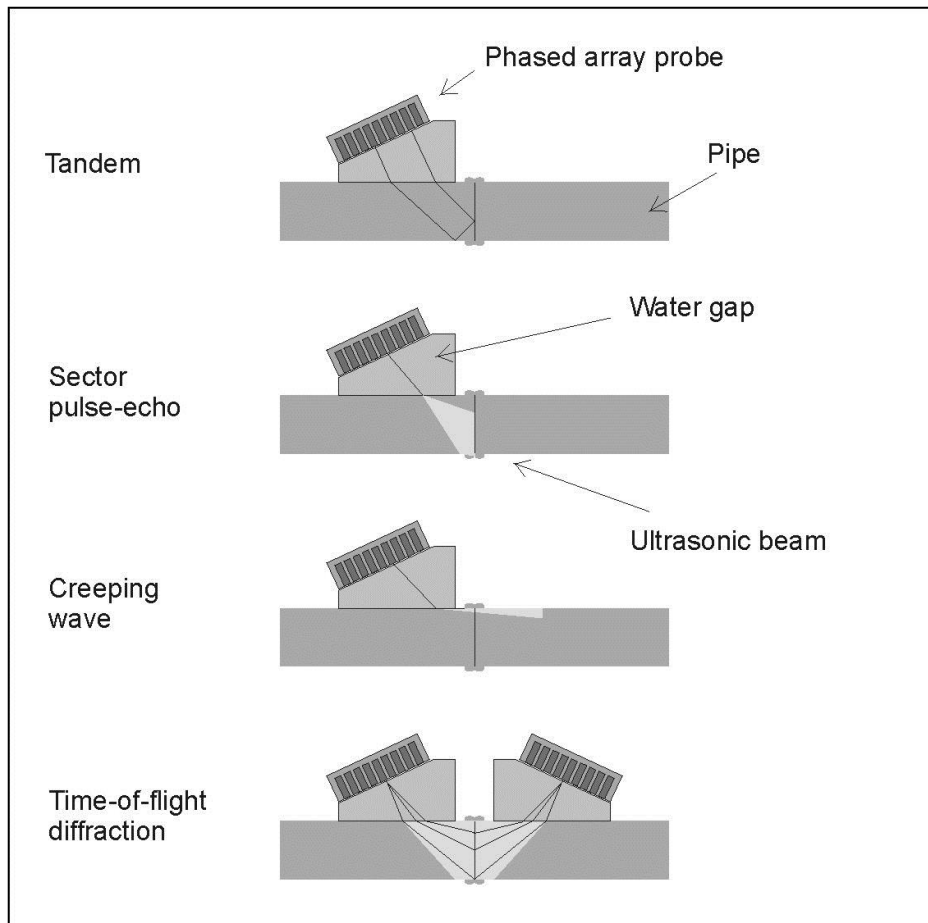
Schematic drawings of the inspection techniques used for butt fusion welds.
